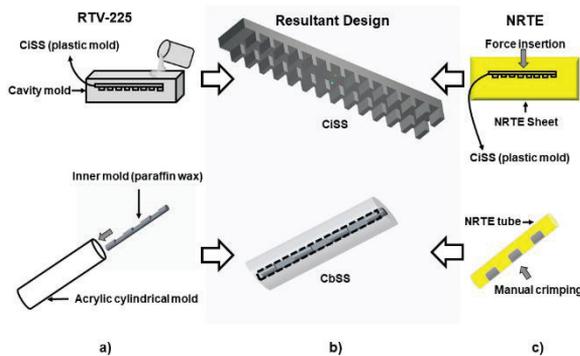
Fabrication processes to develop soft structures using RTV-225 and NRTE-35: (a) Top: Pouring RTV-225 liquid into a cavity mold, Bottom: Inserting an inner mold made of paraffin wax into a cylindrical acrylic mold, (b) CAD view of desired structures of CiSS and CbSS and (c) Top: Pressing manually the CiSS plastic mold on the NRTE sheet, Bottom: Manually crimping the cylindrical wall of the tube made of NRTE
